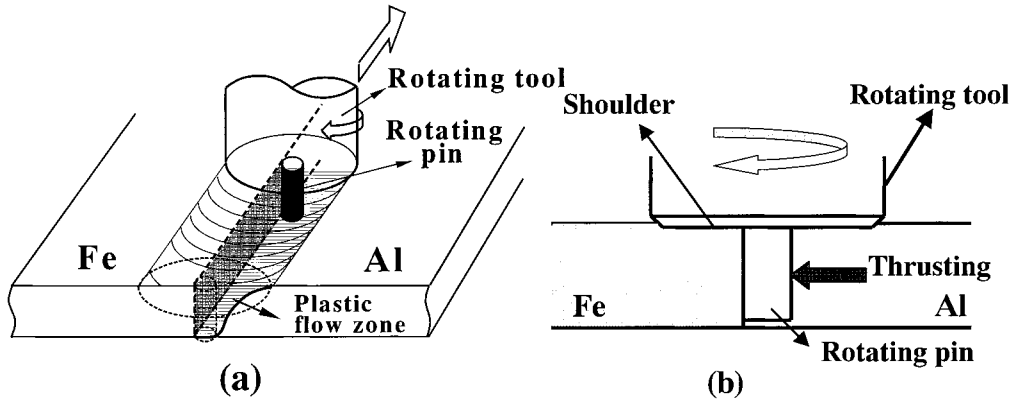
Schematic illustration of solid state welding using a rotating pin : (a) Bird's eye schematic view of the method and (b) schematic view of the cross section perpendicular to weld line.
